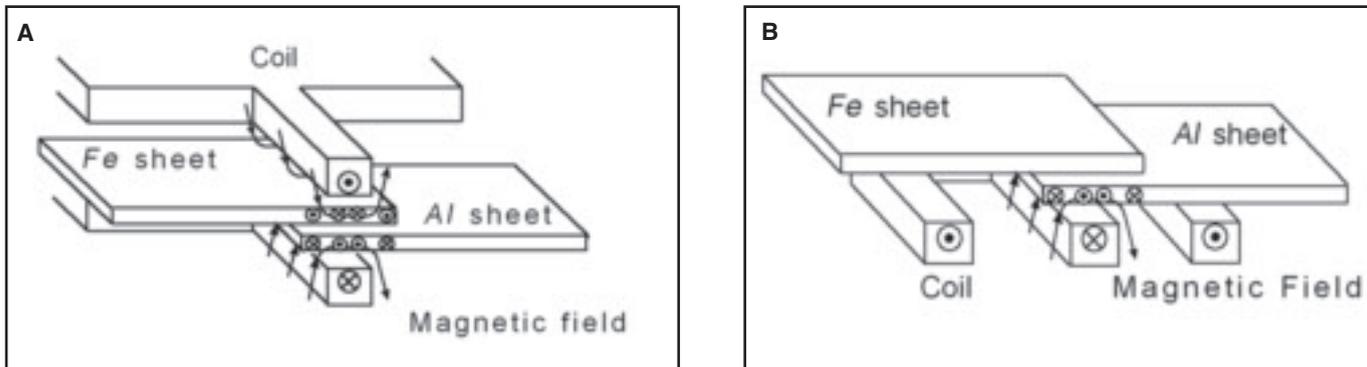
MPW coil structure. A — Double-layer, H-shaped flat coil; B — one-layer E-shaped flat coil.
